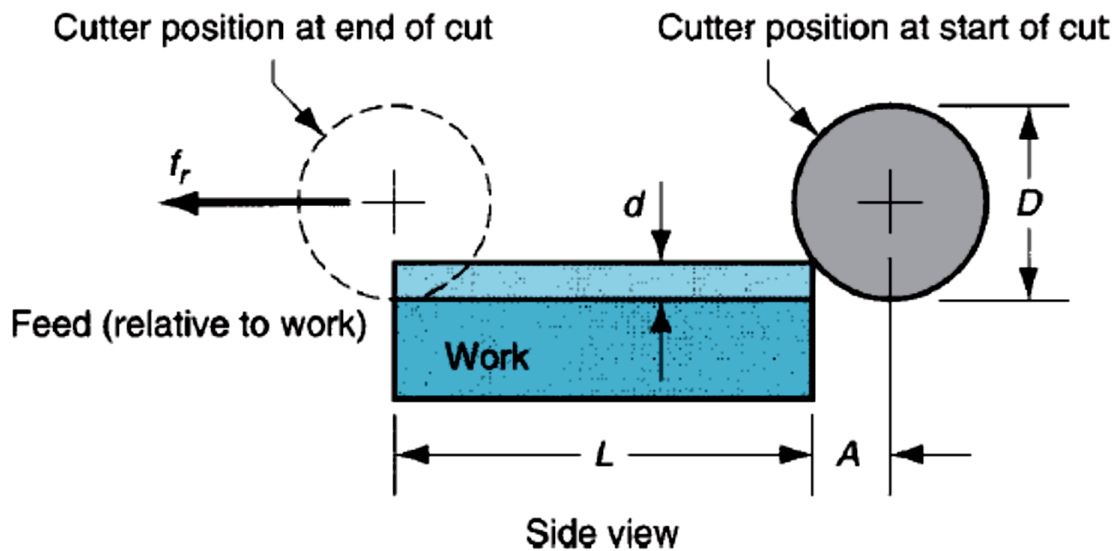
slab (peripheral) milling showing entry of cutter into w.p.
